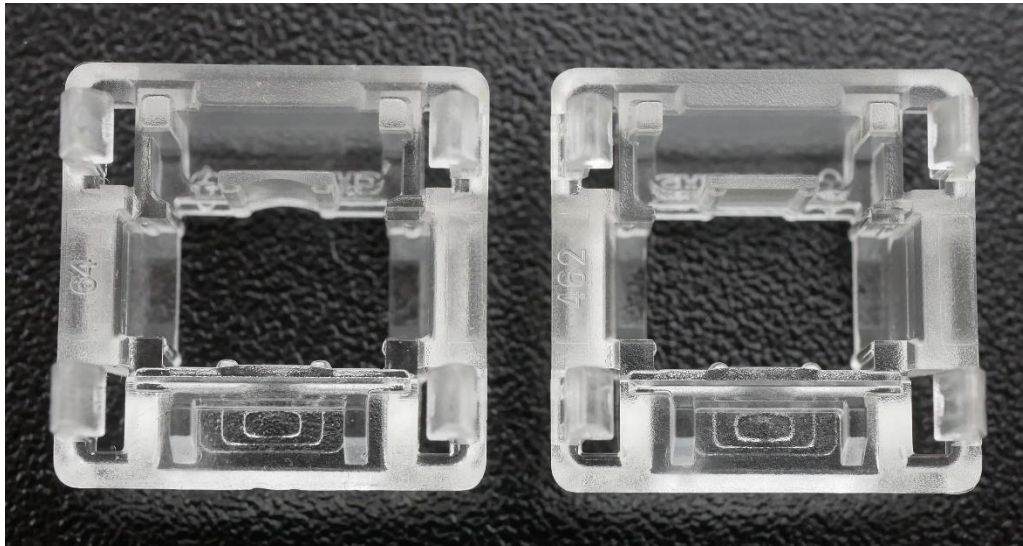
Top housing internal design for MX (Left) and MX2A (Right) RGB switches showing differences in guider rail configuration and mold marking size.
